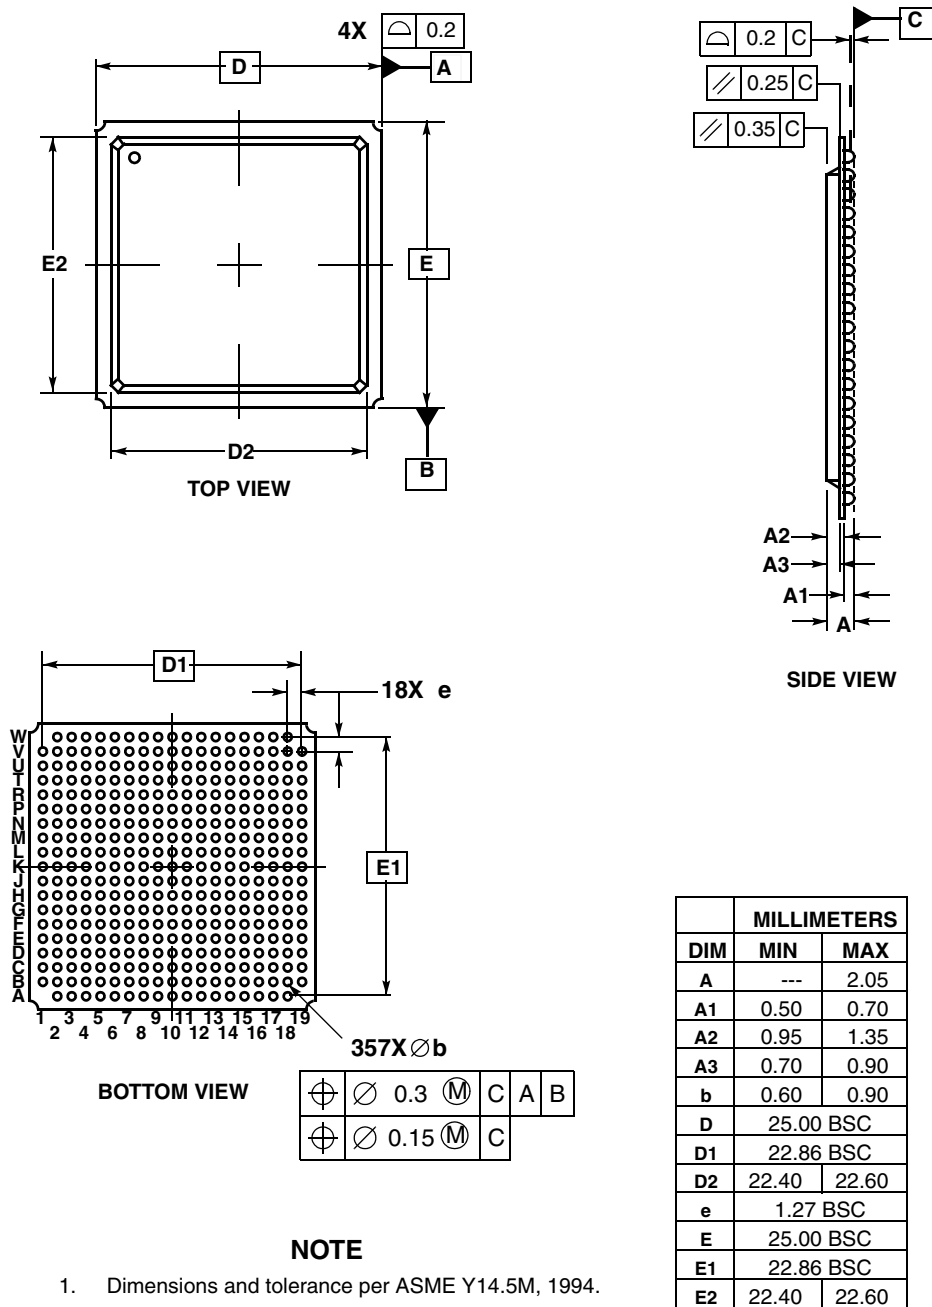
Mechanical Dimensions and Bottom Surface Nomenclature of the ZP PBGA Package
